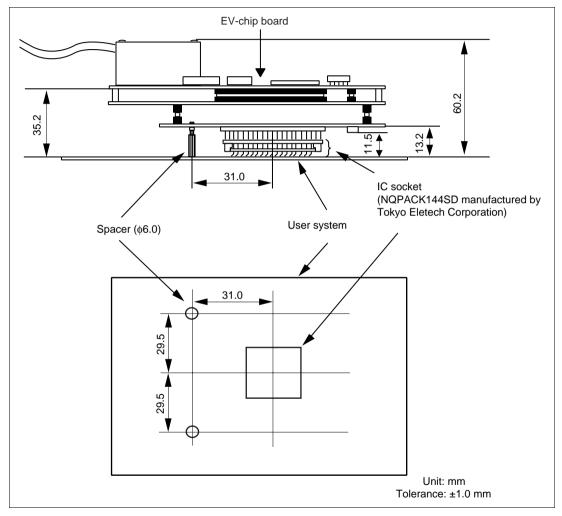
Resulting Dimensions after Connecting User System Interface Board
